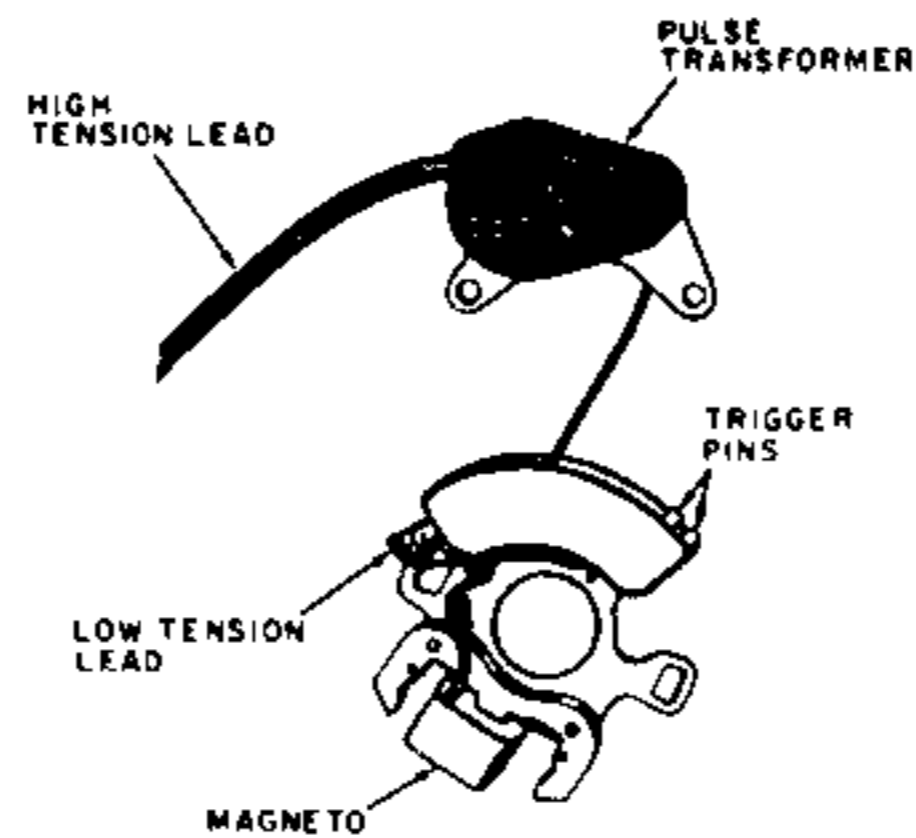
View of solid state ignition system used on engine not equipped with flywheel alternator.
